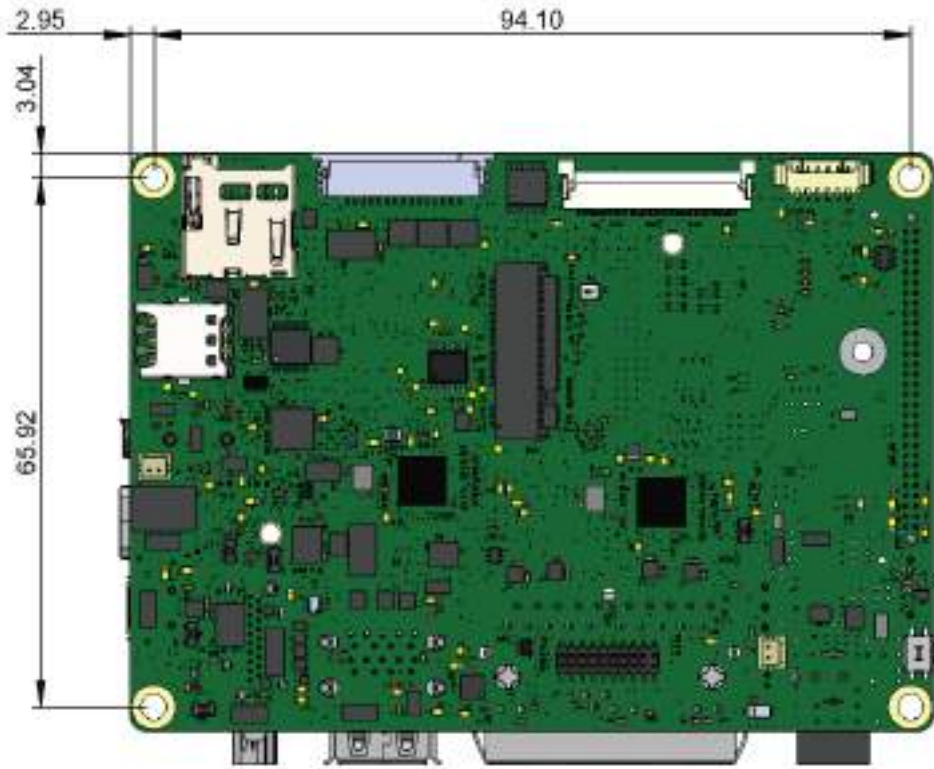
Mechanical Dimensions of i.MX 8X Lite Pico ITX SBC Bottom View
